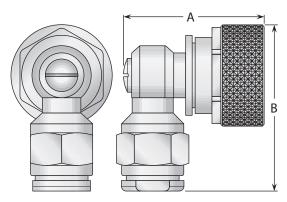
(Clamp type for flexible cable or solder-clamp for semi-rigid cable)
